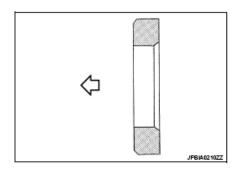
Identifying Crankshaft Side Courtesy of NISSAN MOTOR CO., U.S.A.
